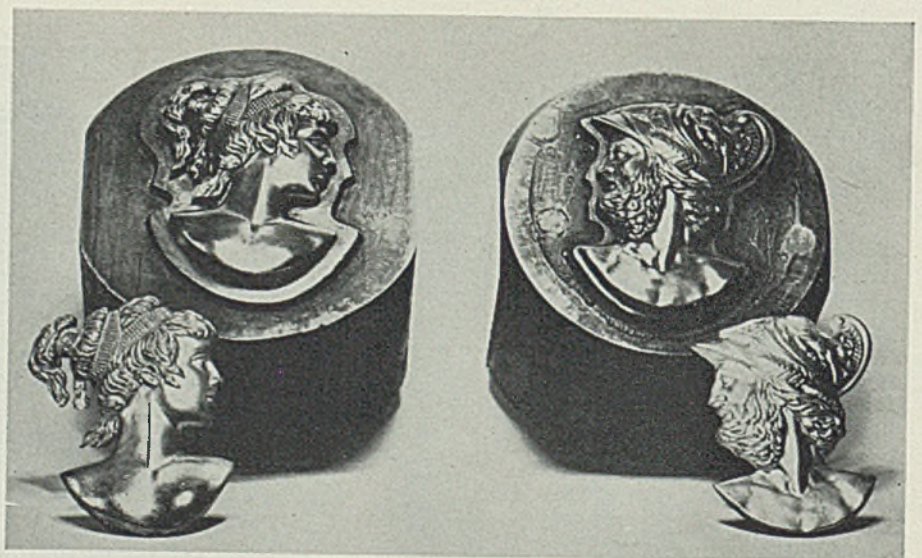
(left)—Master hob of Helen of Troy used in making a cavity mold, also a plaque casting turned out in the mold. (Right)—Master hob of Menelaus used in making the mold in which the plaque casting was produced
